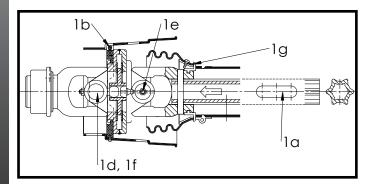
PTO Driveline - Slip Yoke & Universal Joint
